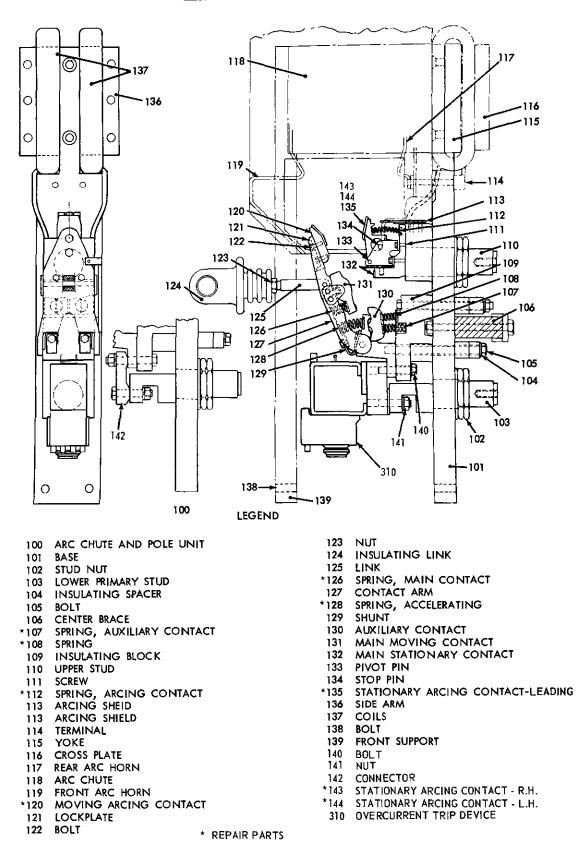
Arc Chute and Pole Unit Assembly
